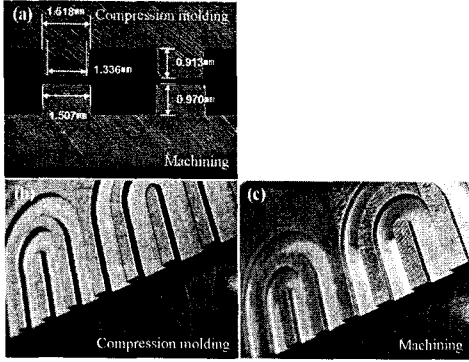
Composite bipolar plate fabricated by compression molding and by machining
